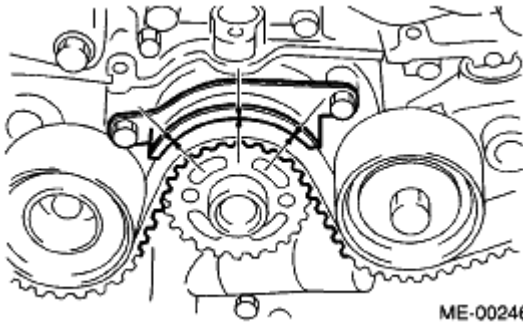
Tightening Timing Belt Guide Mounting Bolts
